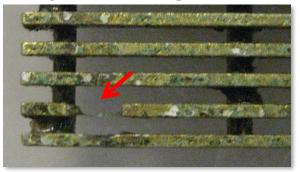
Mechanical damage to 70-30 Cu-Ni wedge wire screen at bottom left corner
